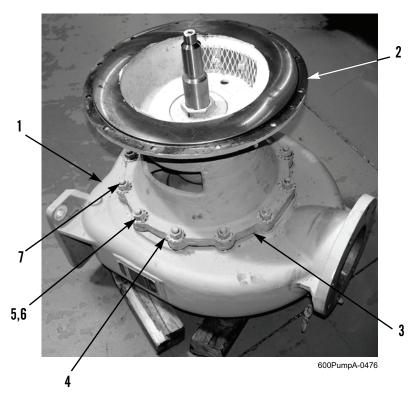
Separating Intermediate Housing and Seal Plate from Pump Casing.
